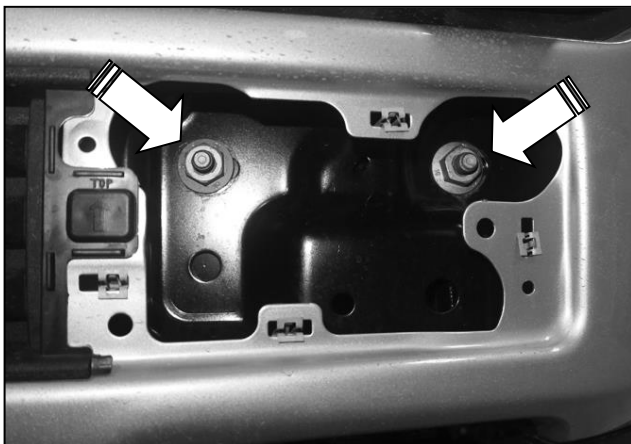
Remove plastic bumper pad from bumper (Driver/left side Pictured)
